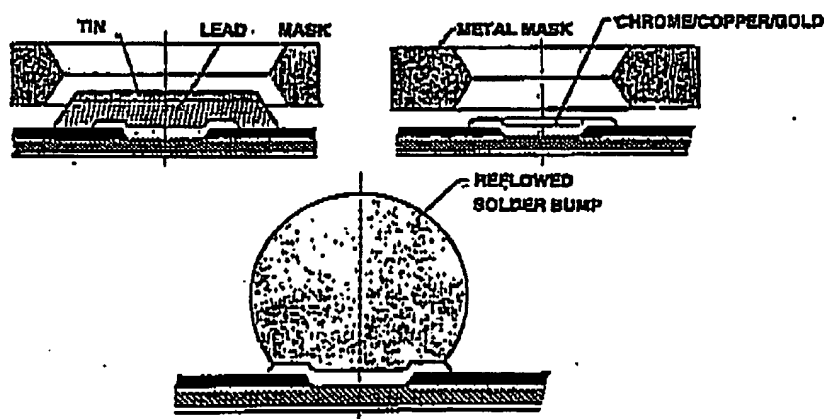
Fabrication of solder bumps for C4 technology.<sup>15</sup> © ISHM 1974.
